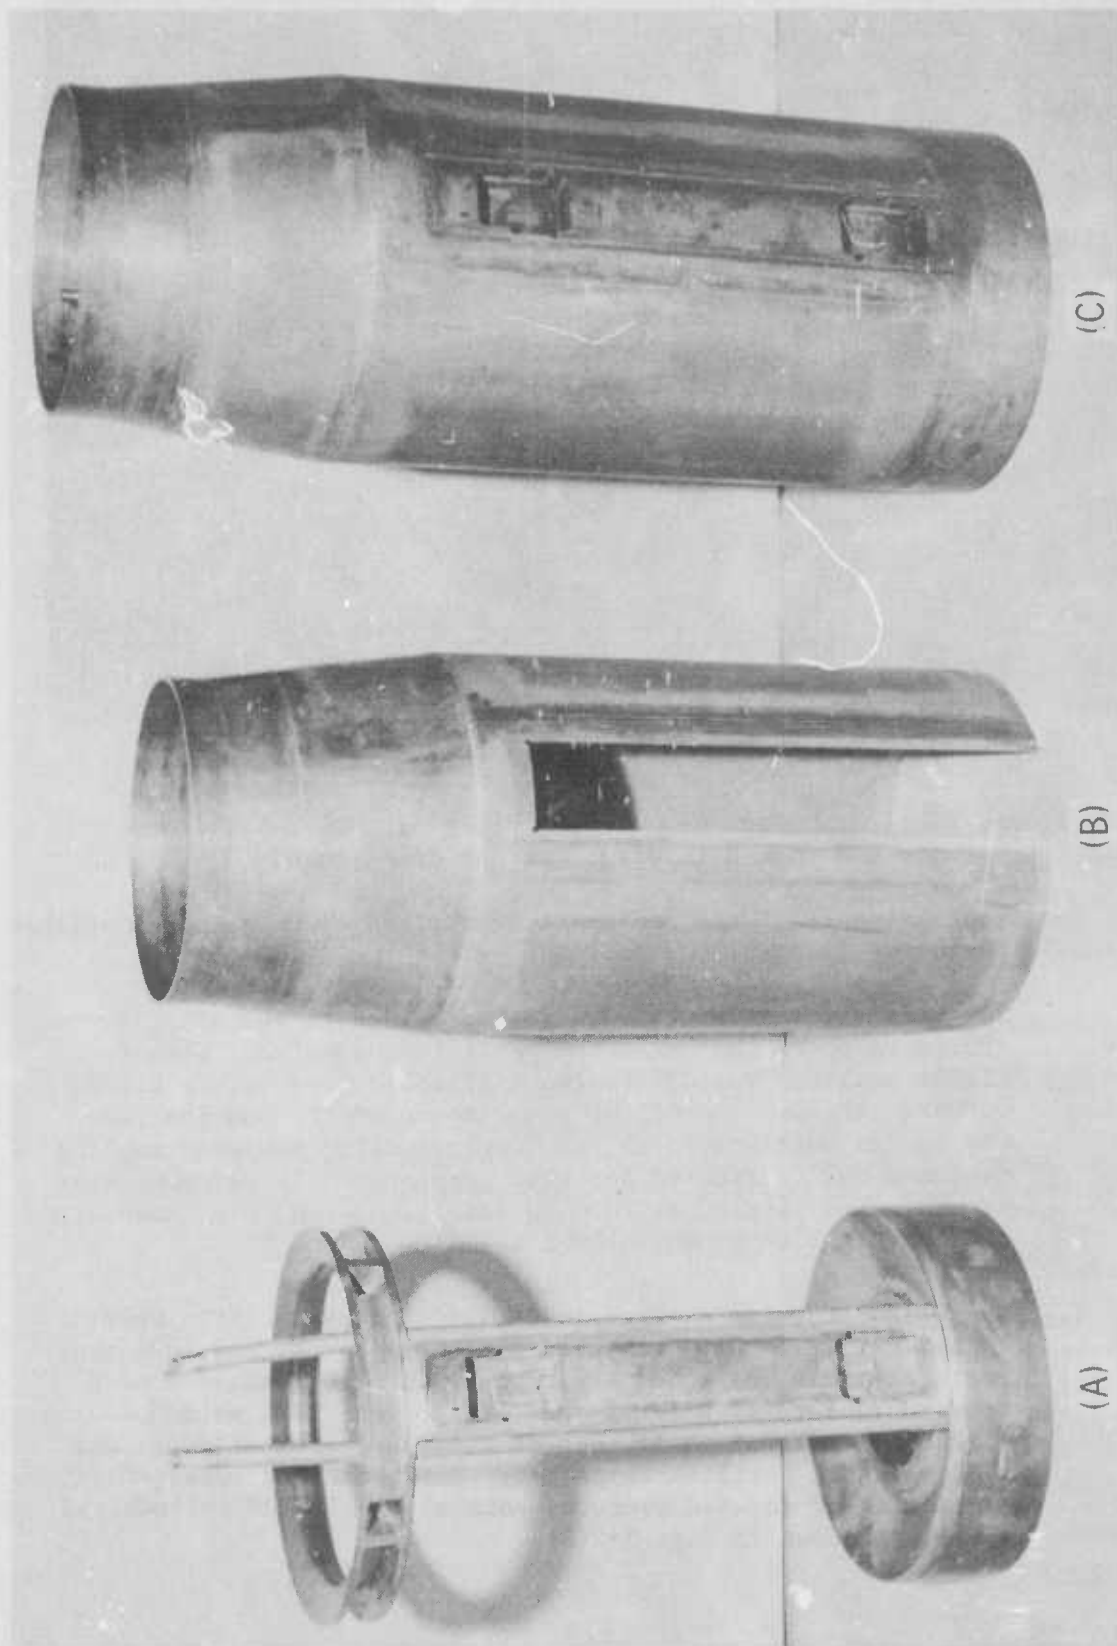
Aft Subassembly, Forward Subassembly, and Final Weldment.
